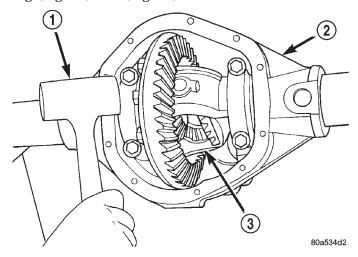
Seat Pinion Gear Side Differential Dummy Side Bearing
